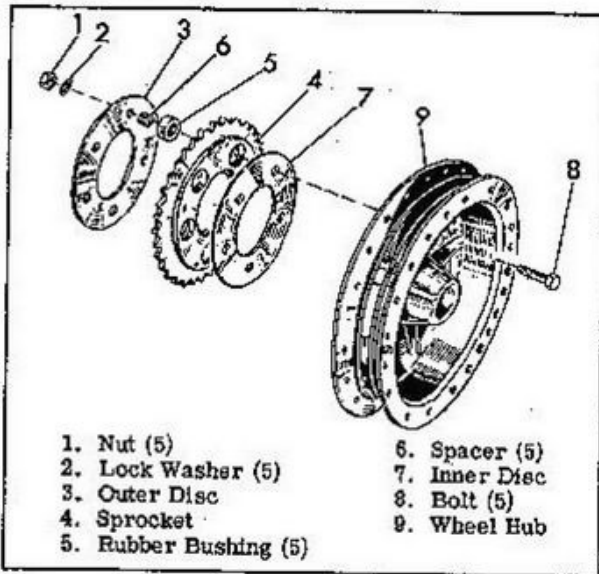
C-40. Removing and Installing Rear Wheel Sprocket (1969 & earlier)
